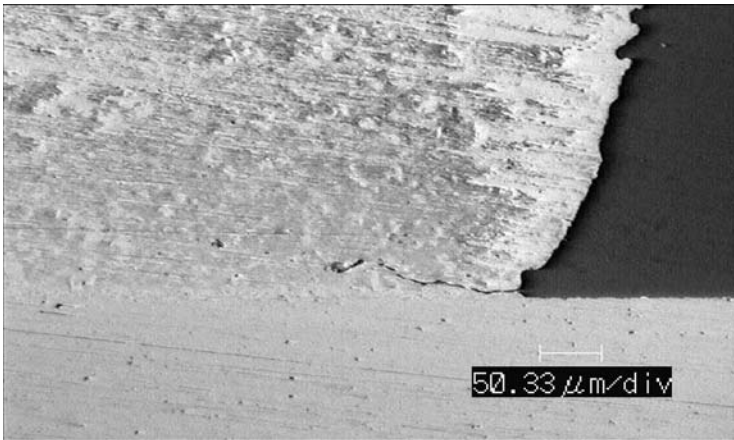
Crack in Sn-3.5Ag-0.75Cu BGA solder joint (B2).
